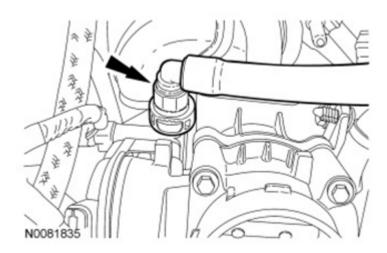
Locating Upper Evaporative Emission Tube Quick Connect Coupling Courtesy of FORD MOTOR CO.
